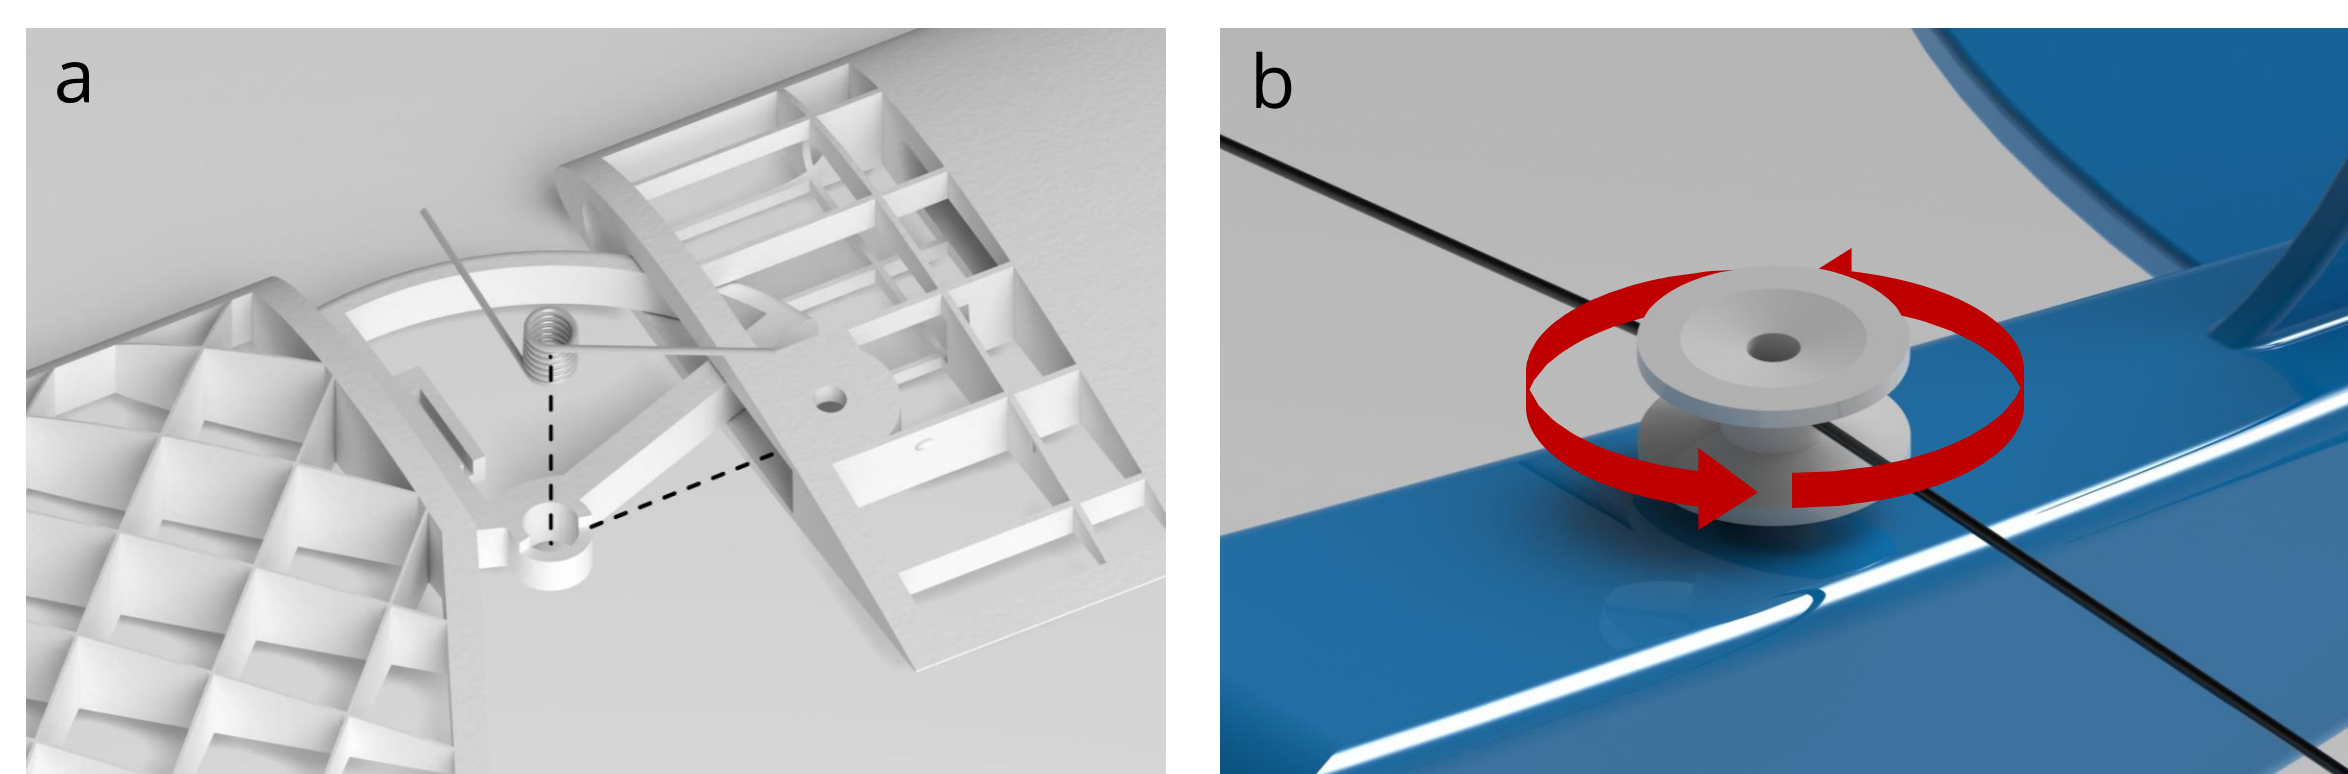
Close-up views of a) wing joint mechanism using a torsional spring of 1.47 in.-lbs. torque and b) spool mechanism with rotational orientations.
